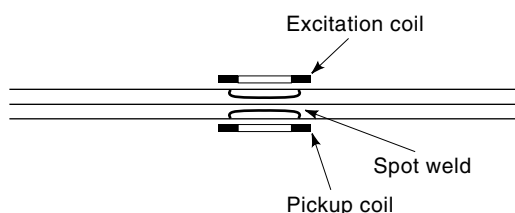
Typical pulsed eddy current probe setup for inspecting spot welds.
